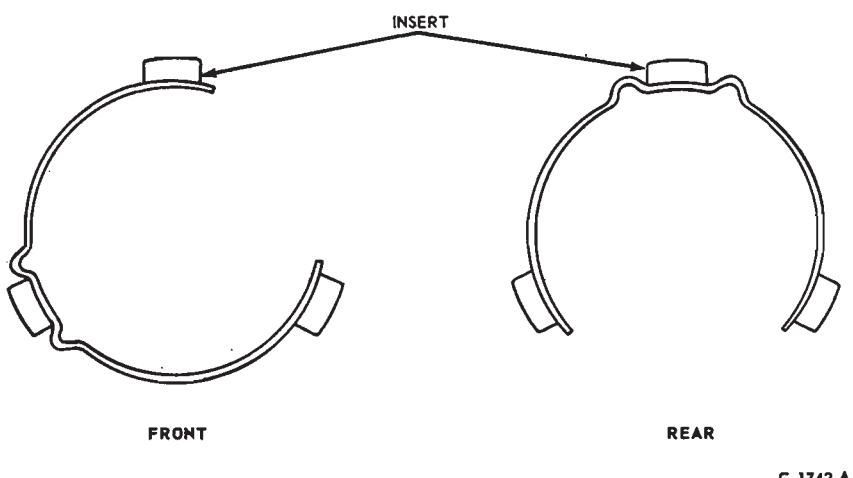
First and Reverse Speed Synchronizer Insert Spring Installation
